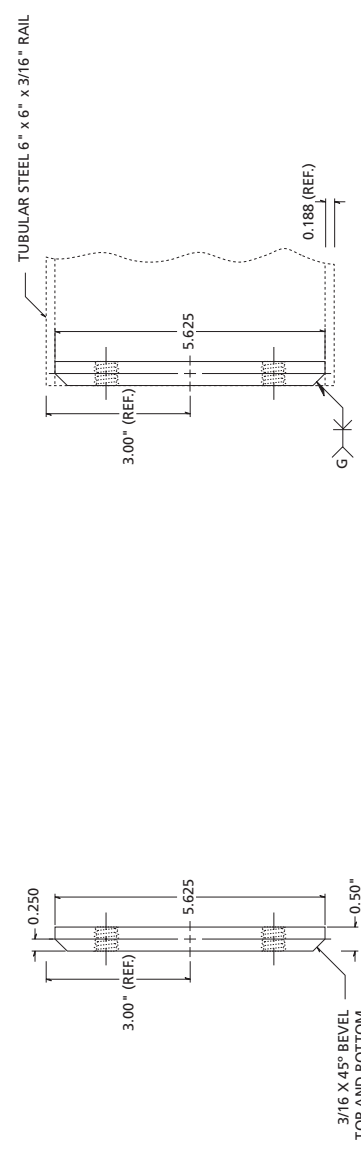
DETAIL POST ASSEMBLY 8 x 6 FRONT ELEVATION
